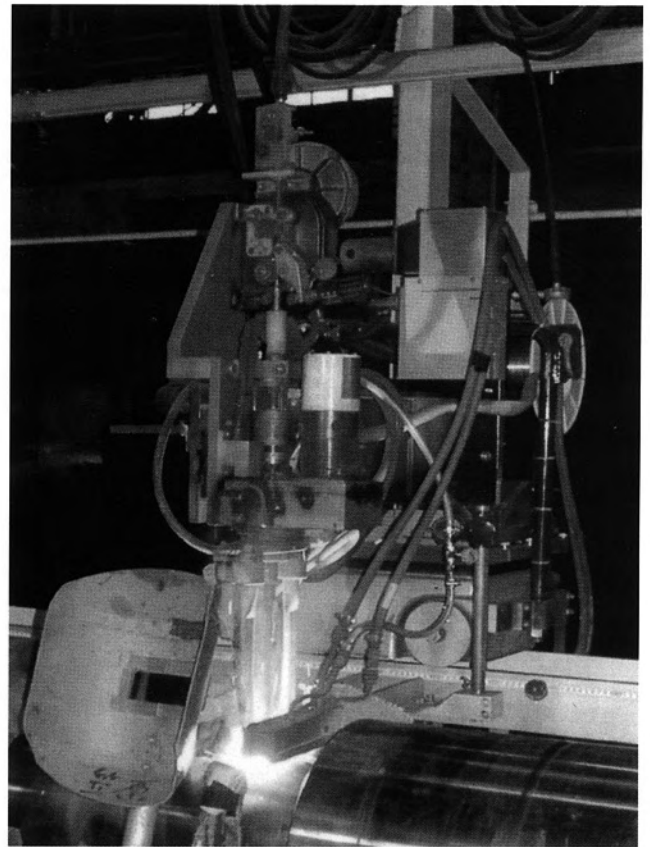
Narrow gap welding equipment with high speed rotating arc
